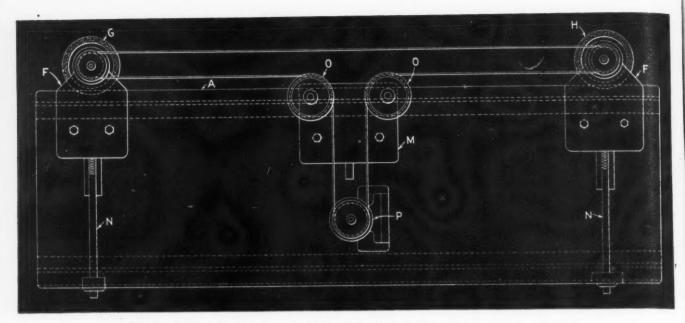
Fixture for Grinding the Under Side of the Ledges that Support the V-ways on Machine Tool Beds Parallel with the Top of the V-ways
